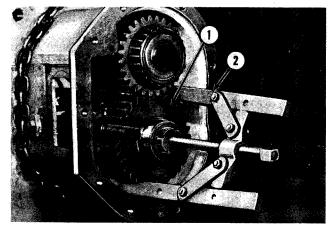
REMOVING LOW SPEED GEAR 1. Low Speed Gear 2. Puller
